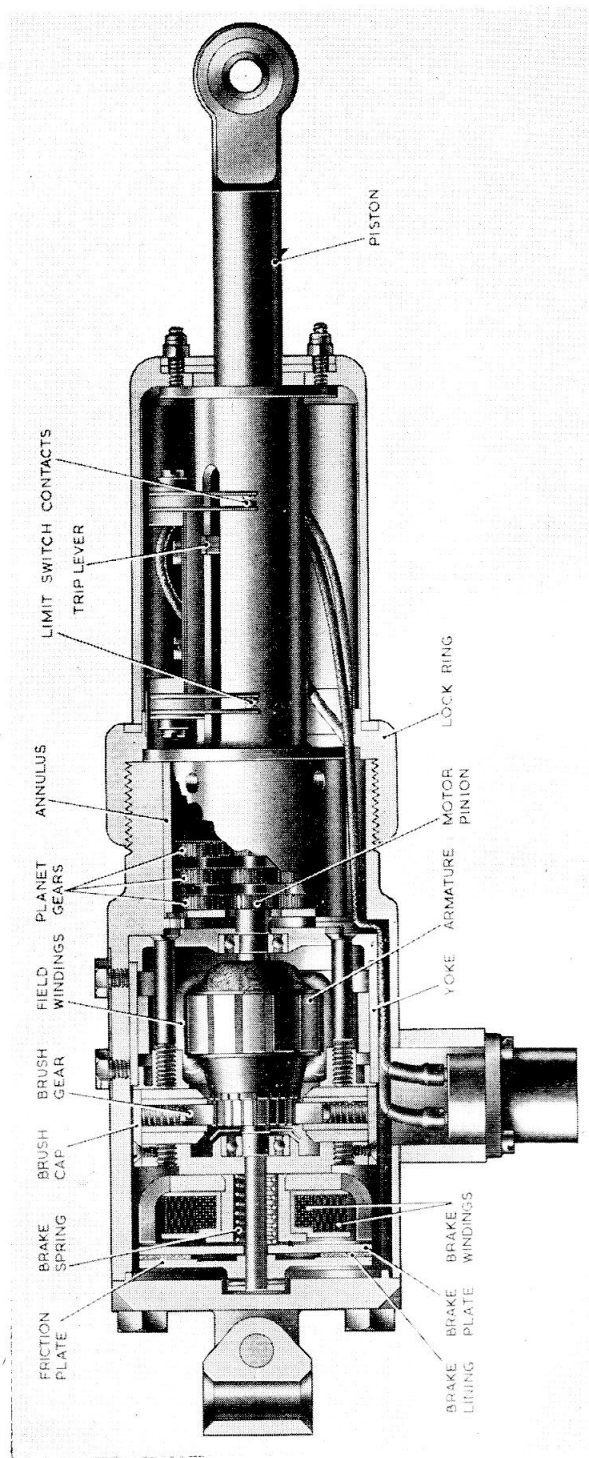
Sectional view of actuator, Type EJ275, Mk. 14
